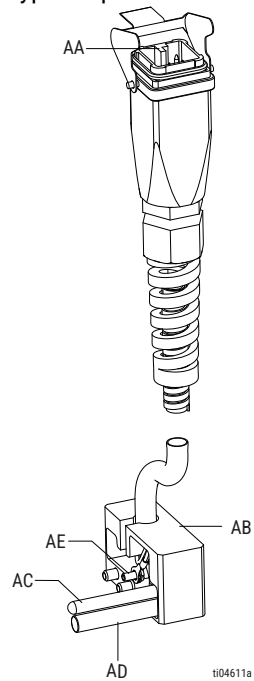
Heater Assembly (for 0 mm Outlet Block), 15N028
